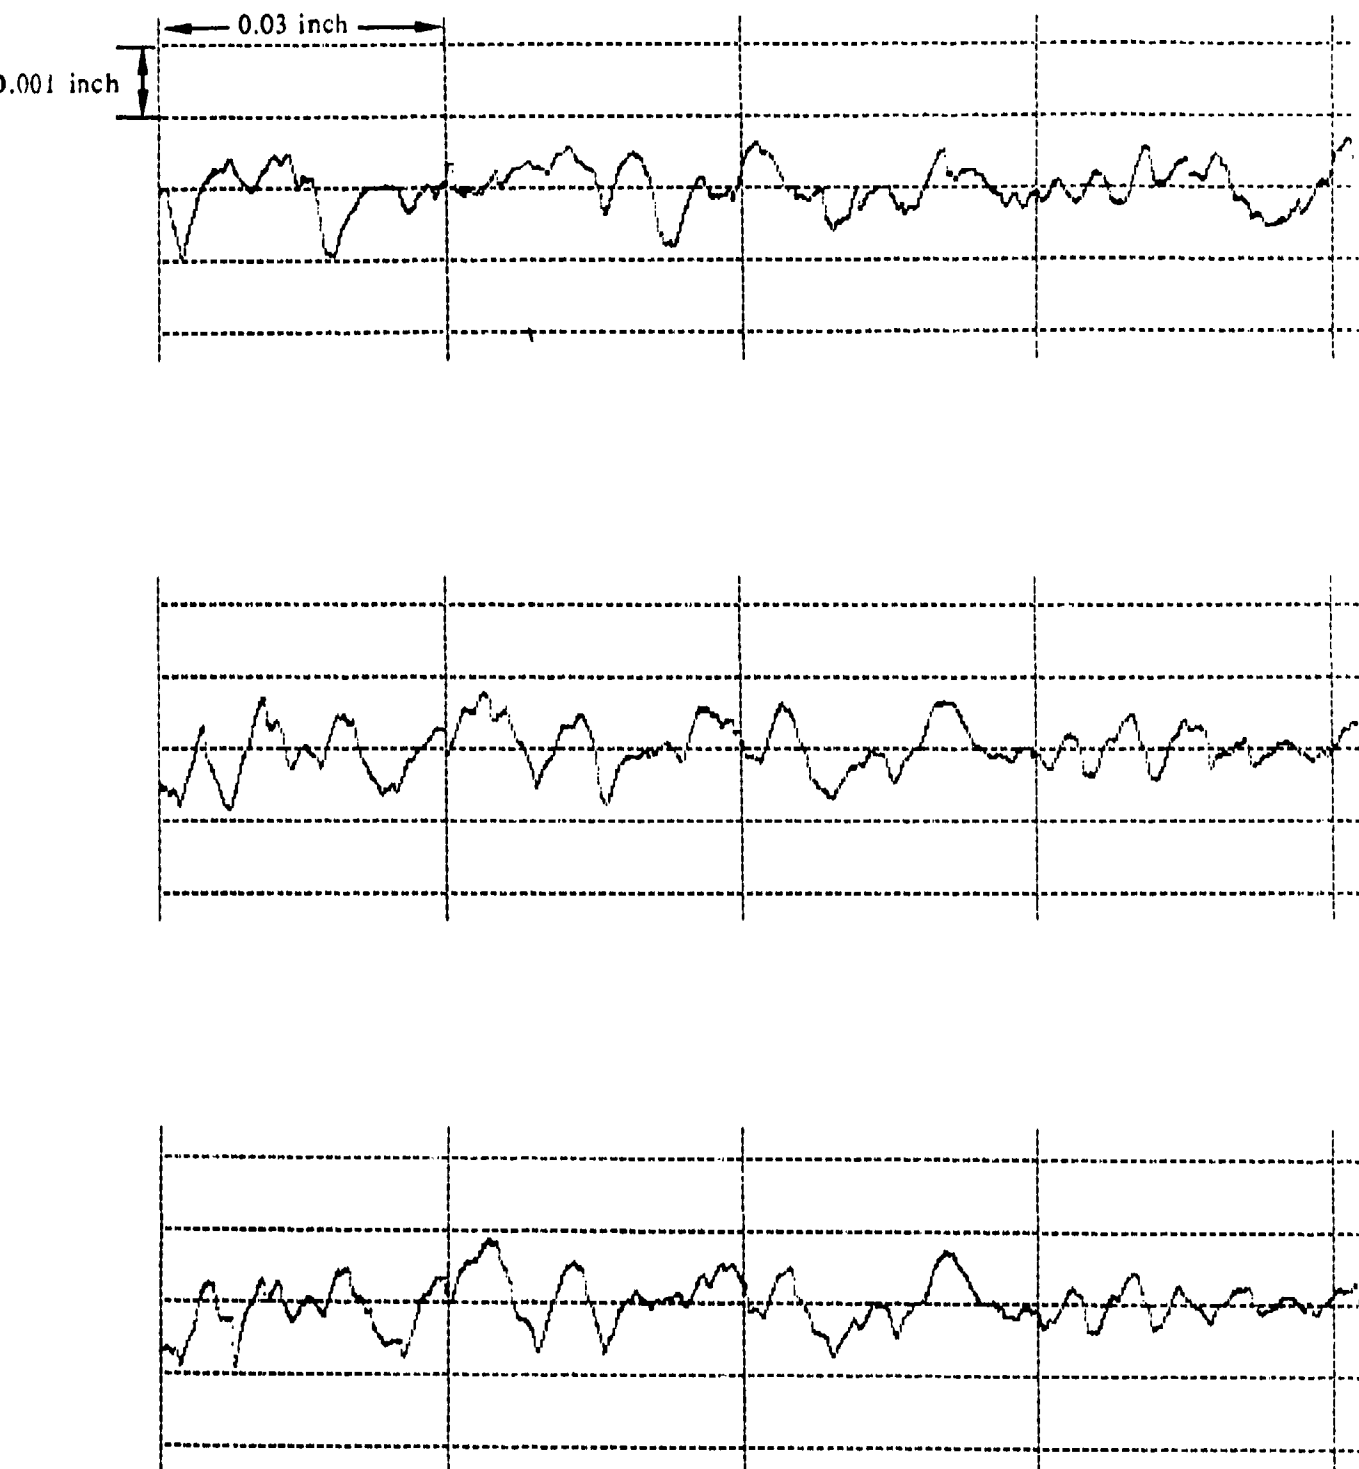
Surface Finish Profile of a Typical Milled Surface at Three Different Locations.
